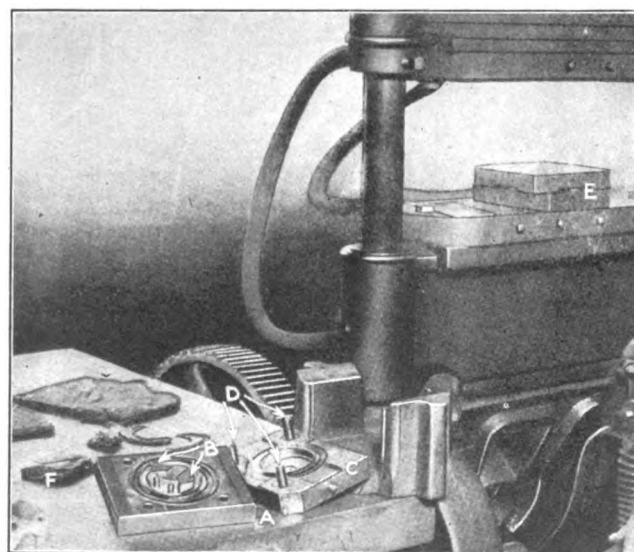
MOLDING MAGNETS INTO EARPIECES
